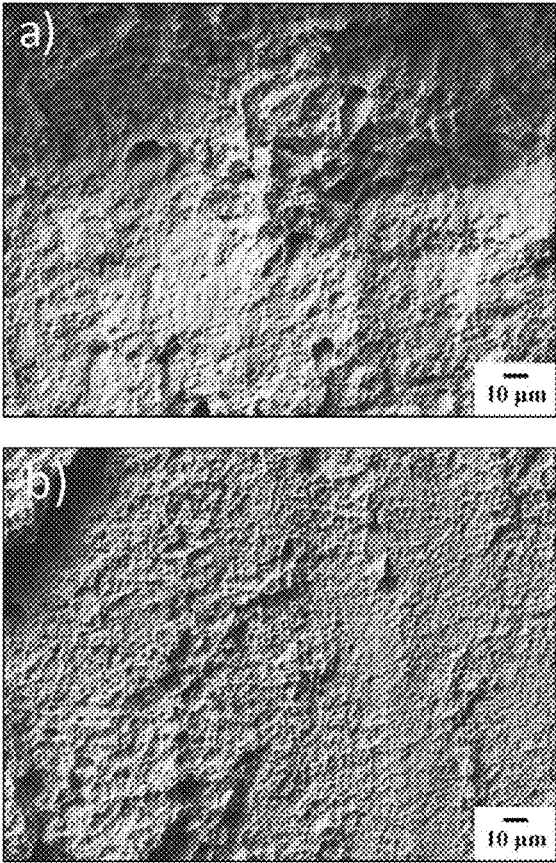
SEM images of the fracture surface in the Sample 1 from Alloy 2 with a notch of 1 mm in diameter; a) in the center of the fracture cross section, b) near the edge of the fracture cross section.
